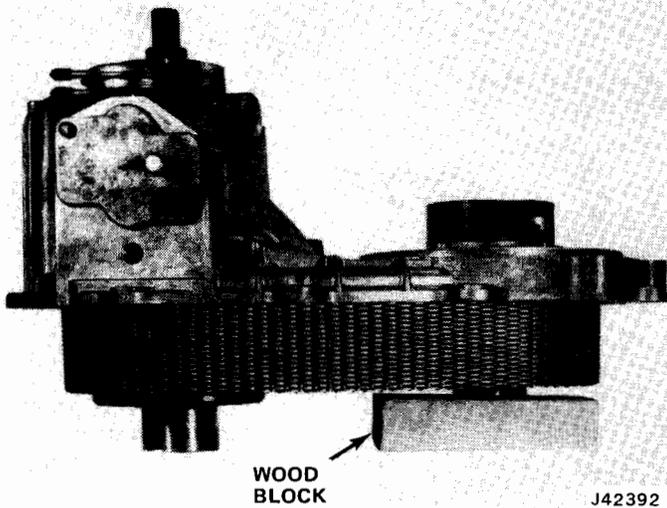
Transfer Case Cover Positioned for Disassembly
